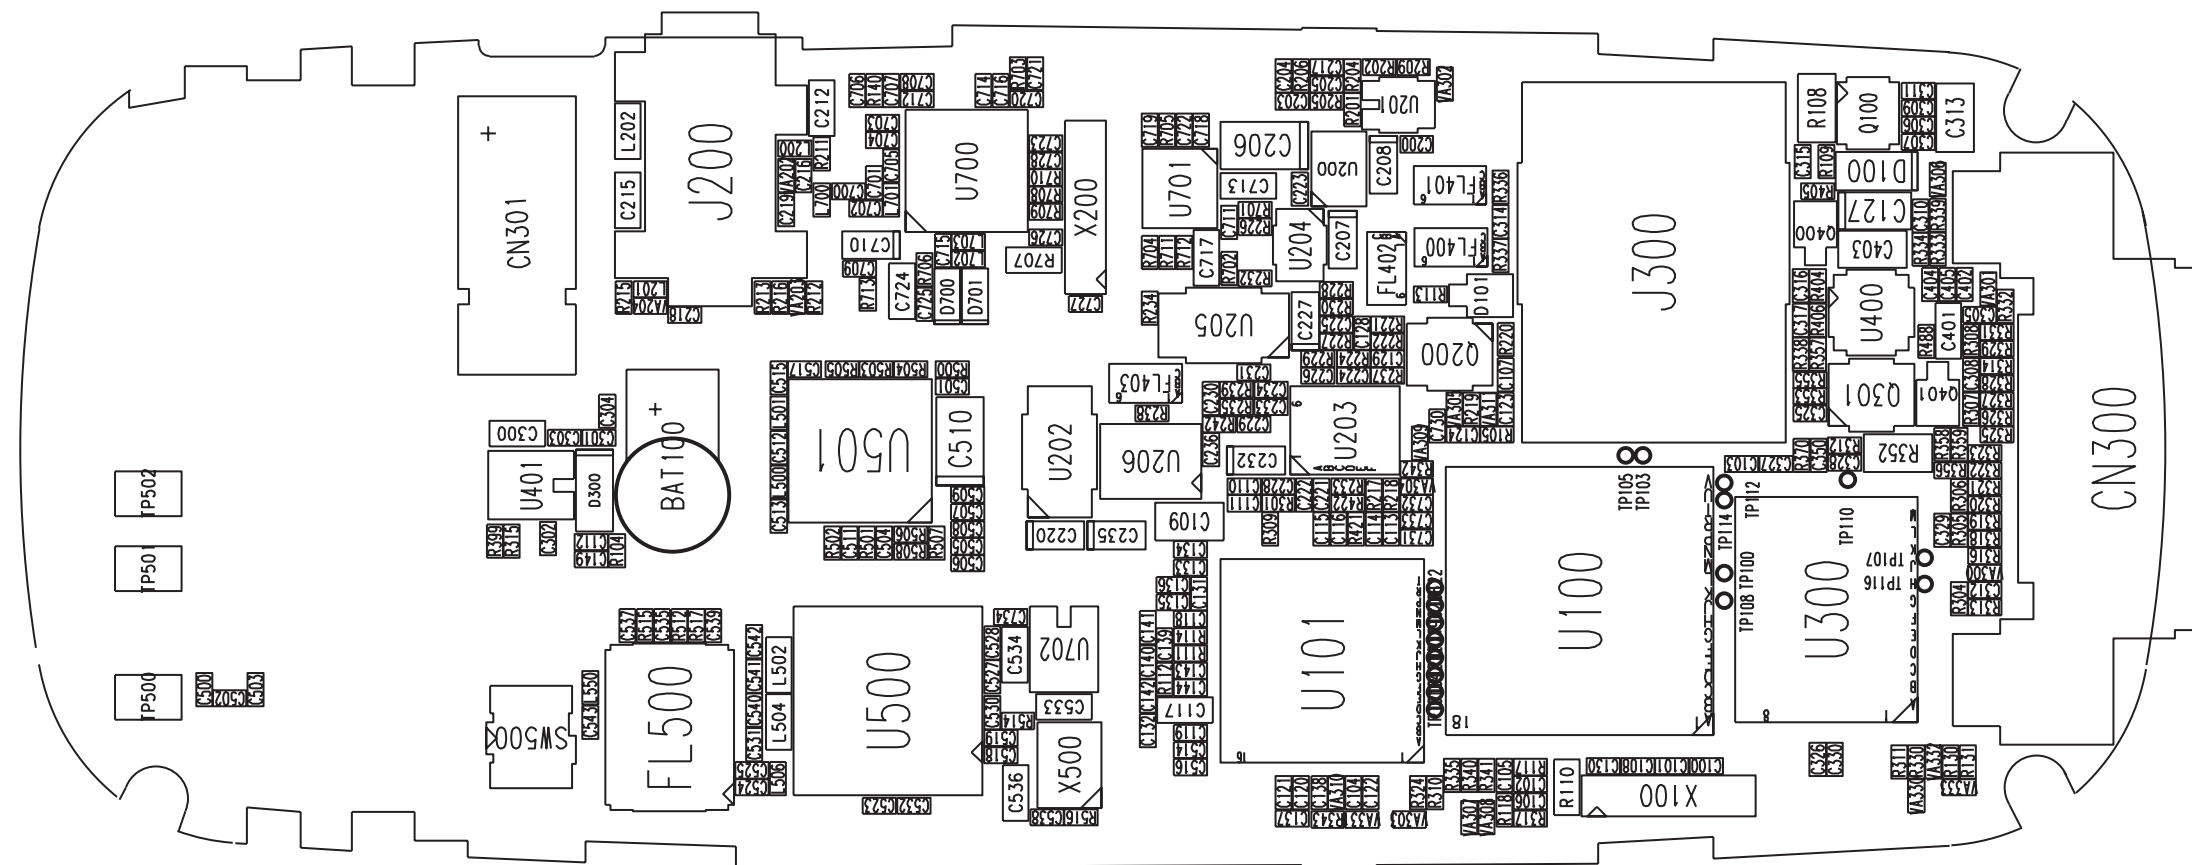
B2070 BOTTOM SIDE PCB LAYOUT
